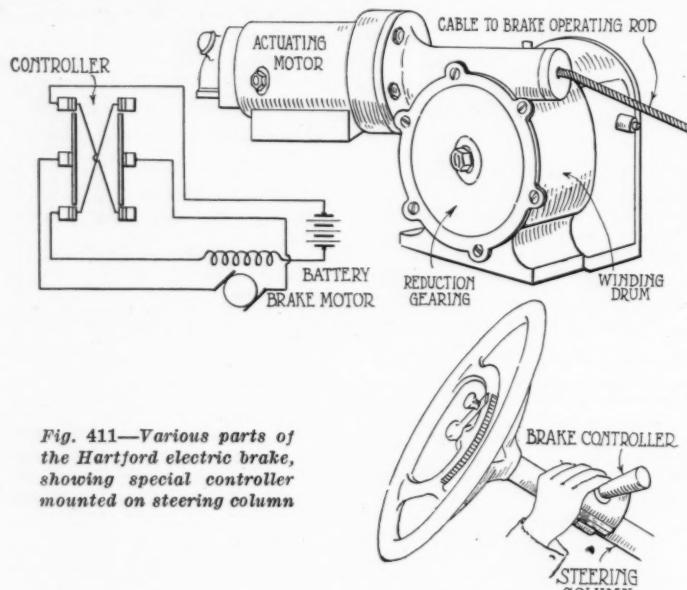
Various parts of the Hartford electric brake, showing special controller mounted on steering column
